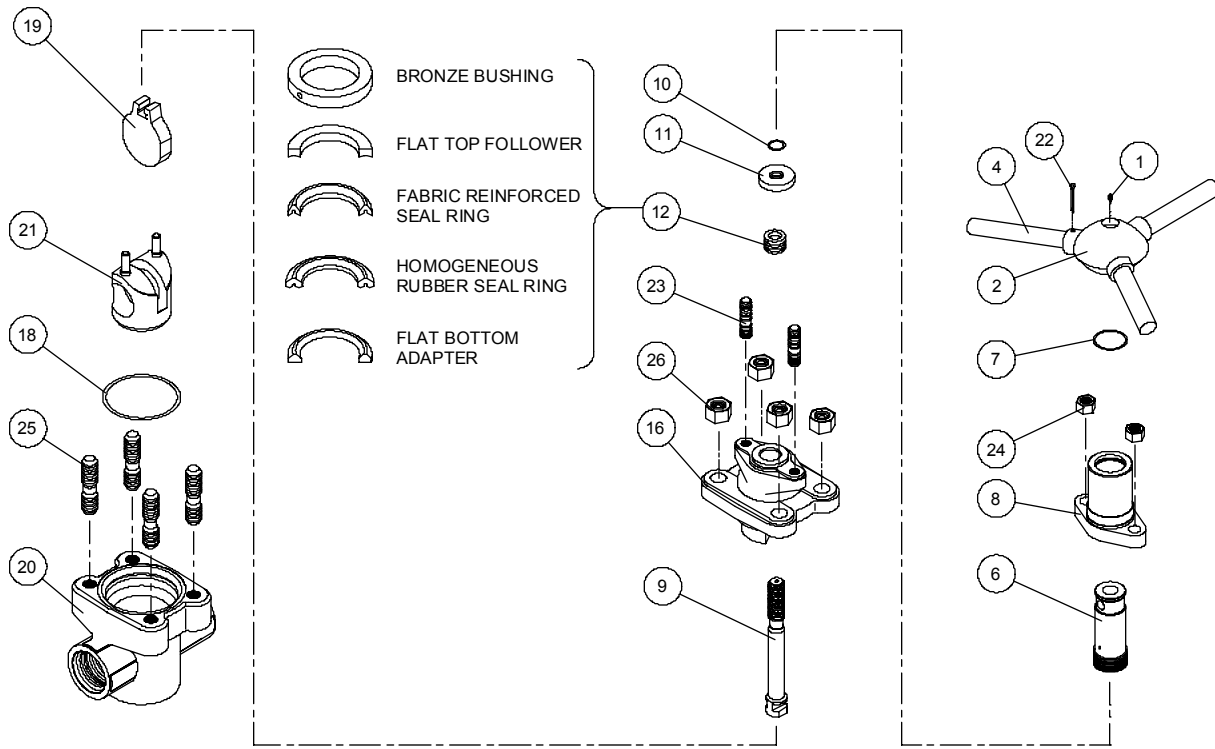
Series DM Gate Valve 2000-3000: 2-1/2" - 5x4"; 5000: 3" & 4x3"; Class 1500: 4"; 1000: 5"
